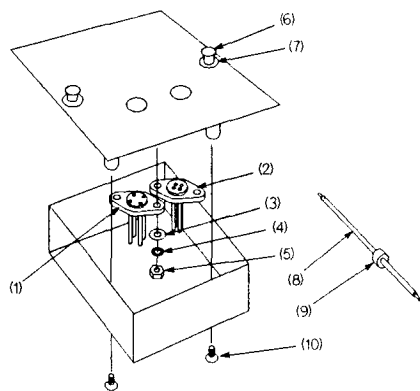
TO-3 or TO-66 Package Socket Module
